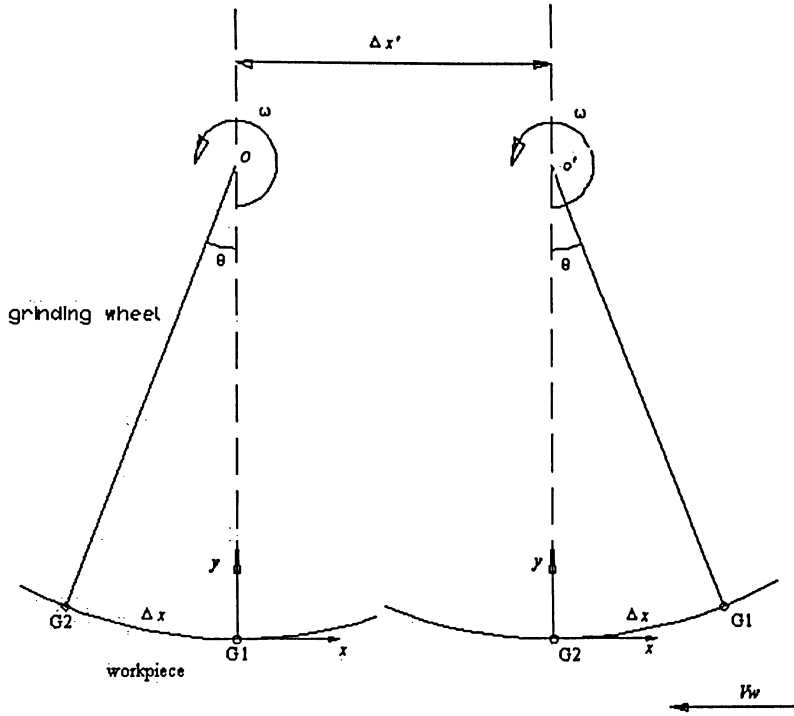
Geometry of cutting path for adjacent grains engaged with workpiece
